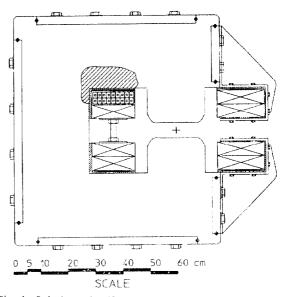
End view and coil configuration of the storage ring dipole magnet and horizontal steering trim coil.
